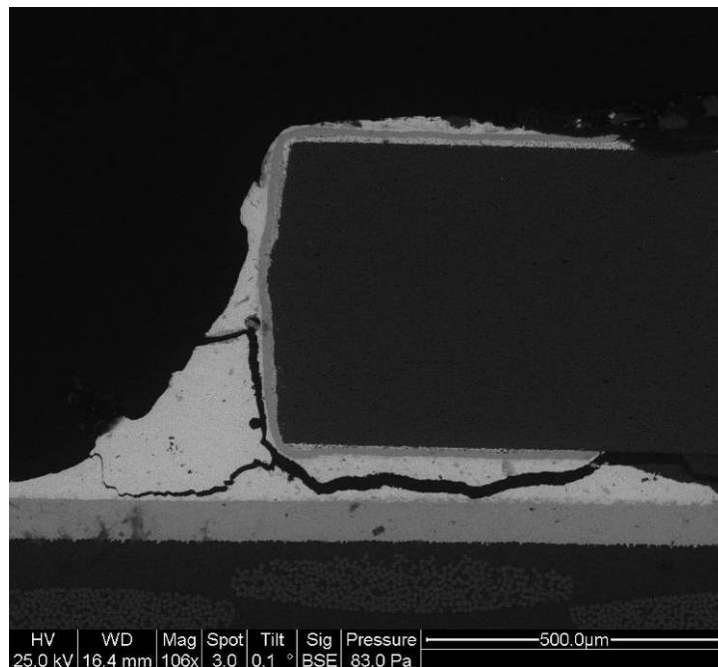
Solder crack of SAC305, resistor 23 (standard pad), failed at 22,440,600 cycles
